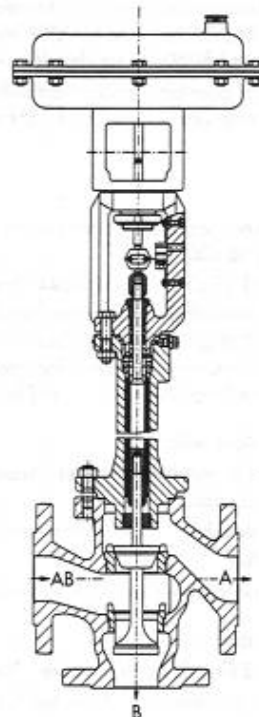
· Type 3244-7 Pneumatic Control Valve with:
